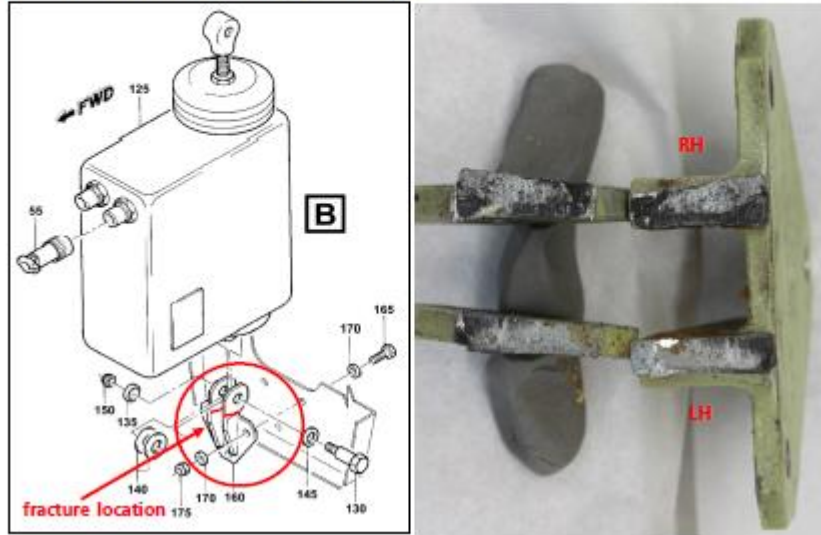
IPC illustration of the HT-Trim Actuator (IPC) and the failed Fitting (P/N 116.4006.033 A) in as removed condition.
